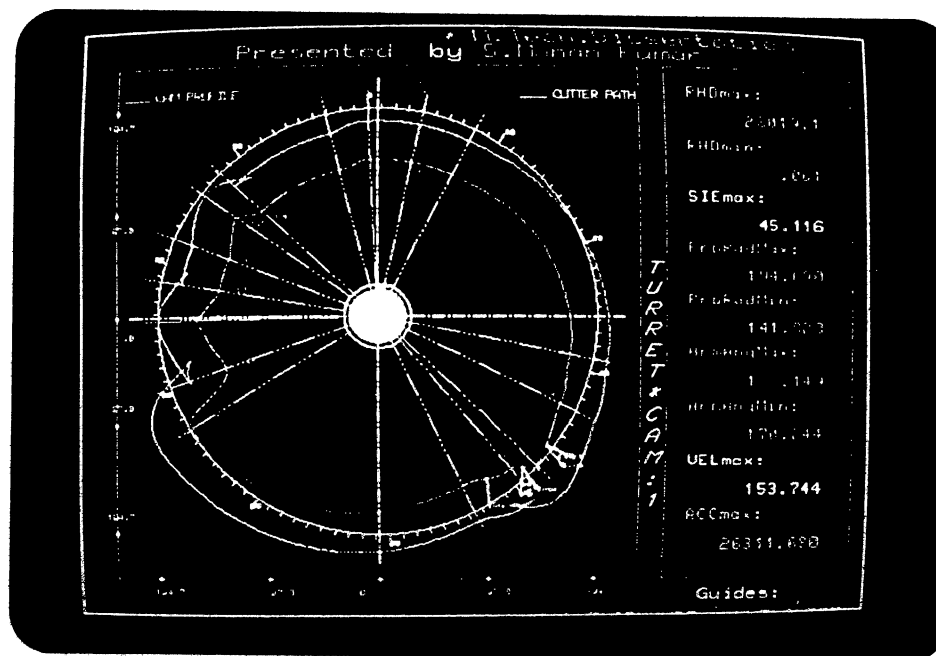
Photograph Showing the Display of Turret Cam with Cutter Path
